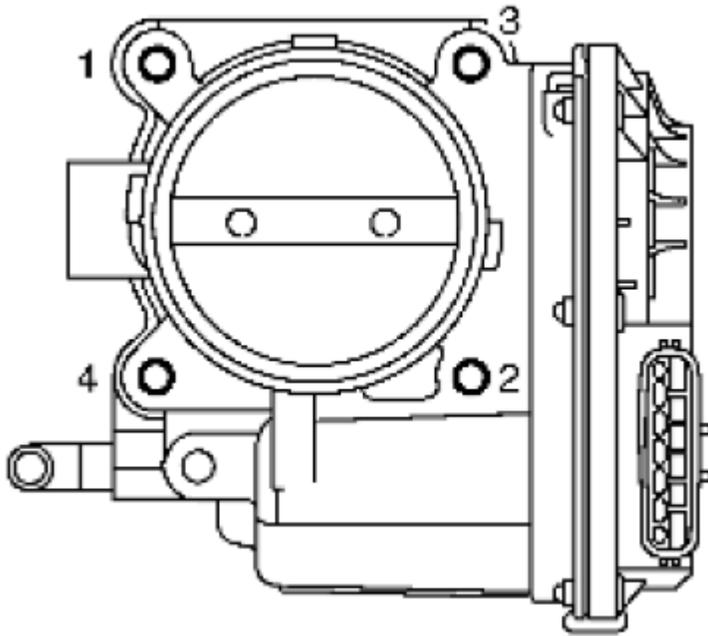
Tightening Order Of Electric Throttle Control Actuator Bolts
